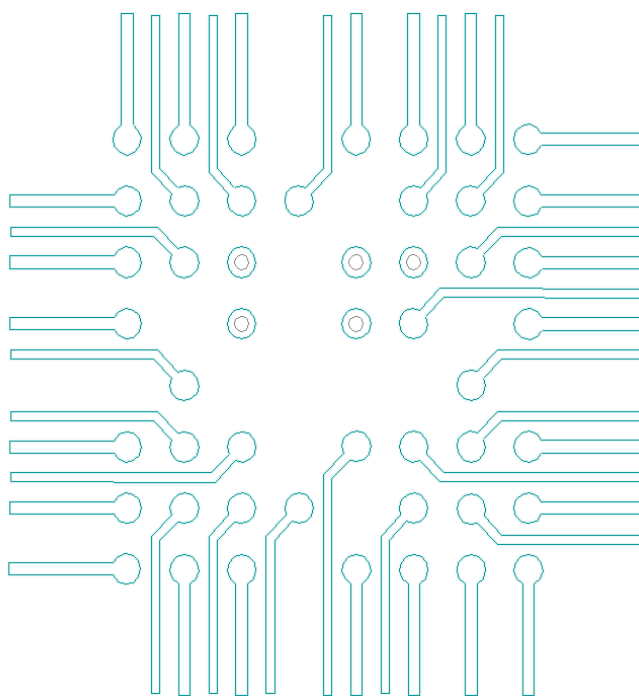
• Suggested Board Layout of Soldered Pads for  $\mu$ C81 CSPs (PCB Lower Layer)
